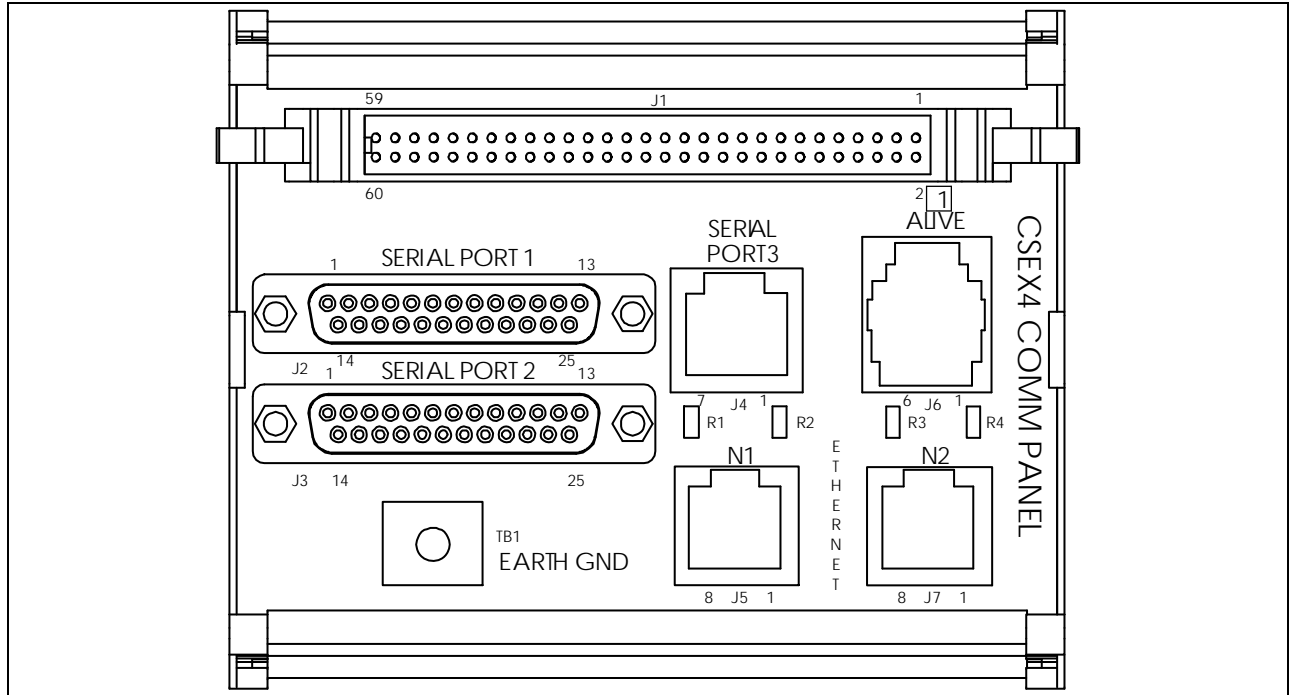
CSEX4 Interface Board, P/N 31166-500-00
